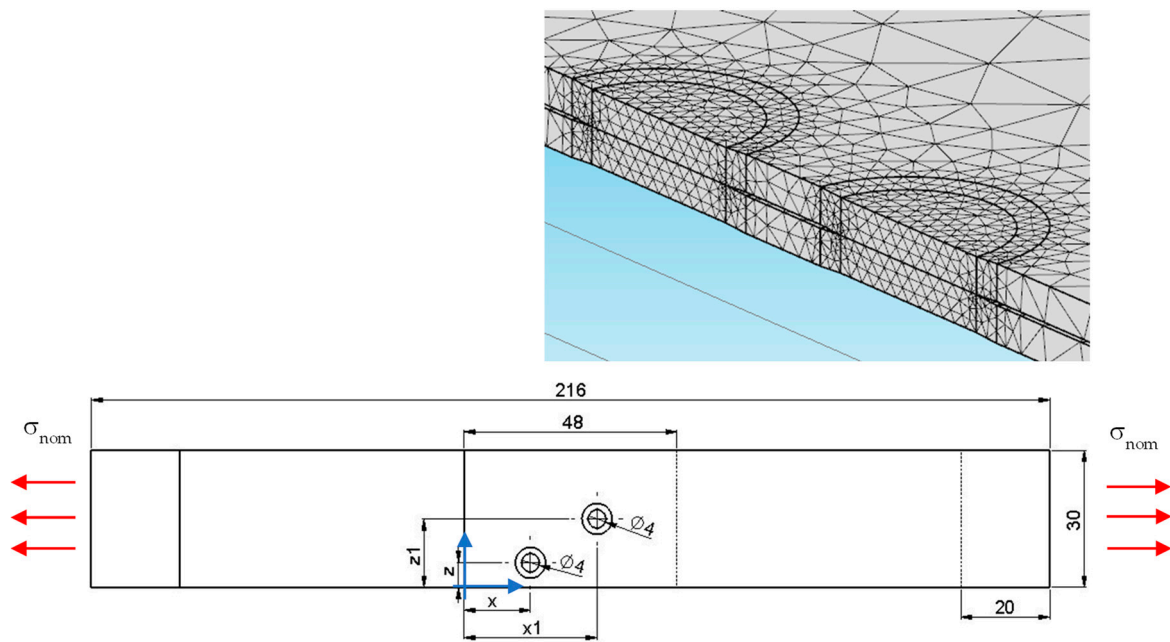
Specimen size and typical mesh for two spot welds (d : spot weld diameter = 4 mm; t : plate thickness = 1 mm; σ_{nom} : tensile nominal stress).
